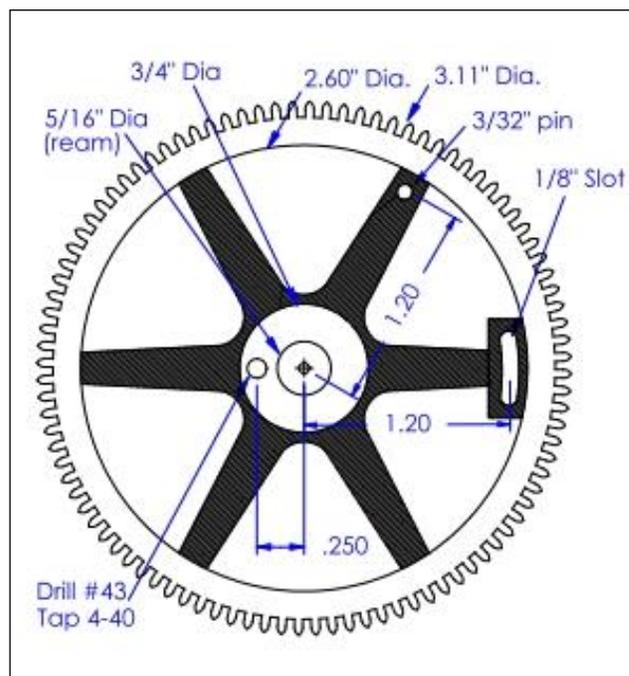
96-tooth great wheel. Blank diameter = 3.111" Module = 0.8 Material = 3/16" 356 brass. Trepan shaded area to 3/32" thick.
